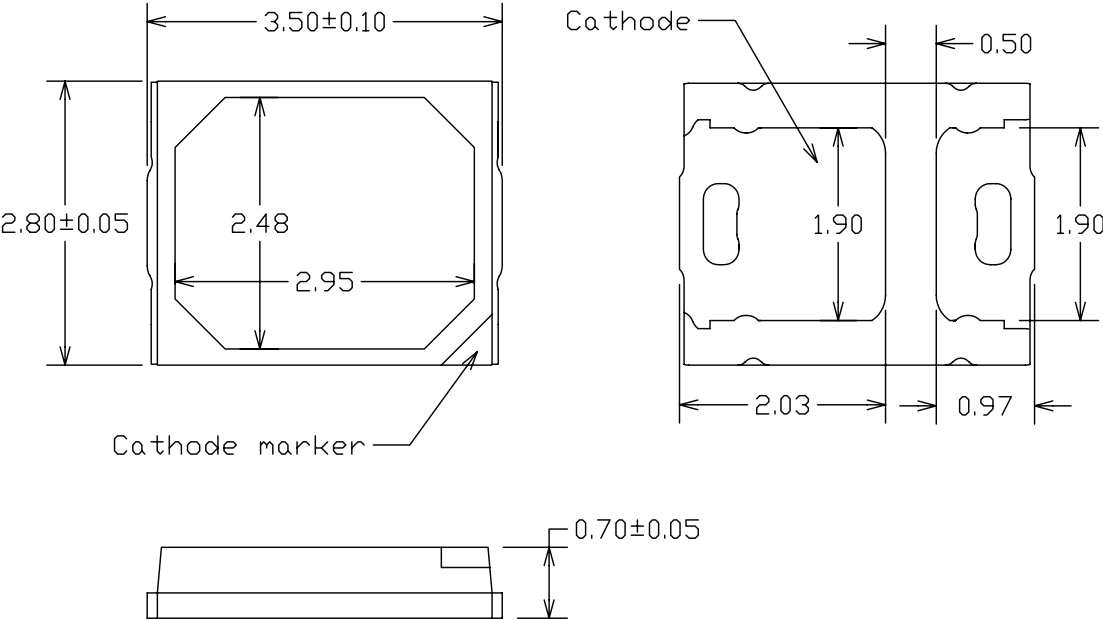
Mechanical dimensions for LUXEON 2835 Line.
